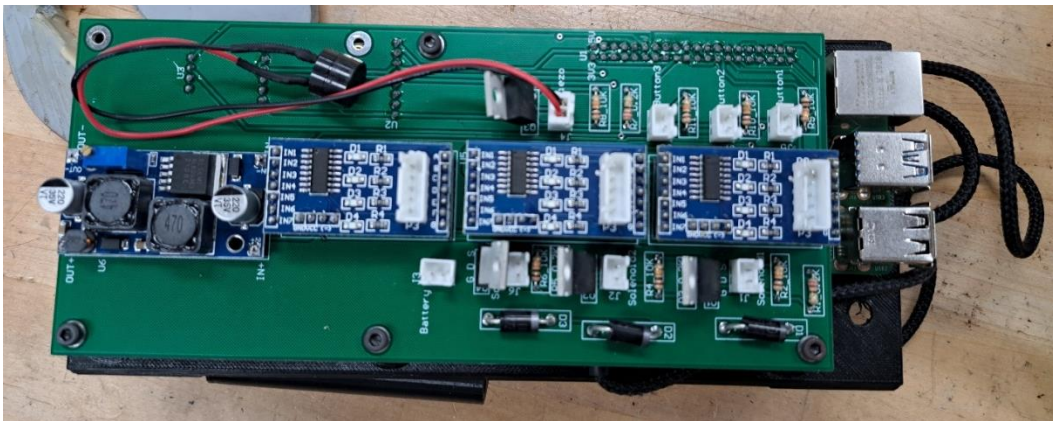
Top view of the Payload Electronics Housing Assembly after the Payload Demonstration Flight
